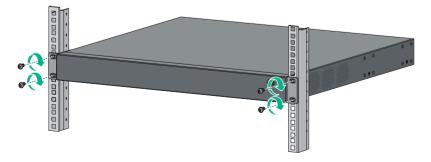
Mounting an HPE 5130 24G SFP 4SFP+ EI switch by the rear mounting position
